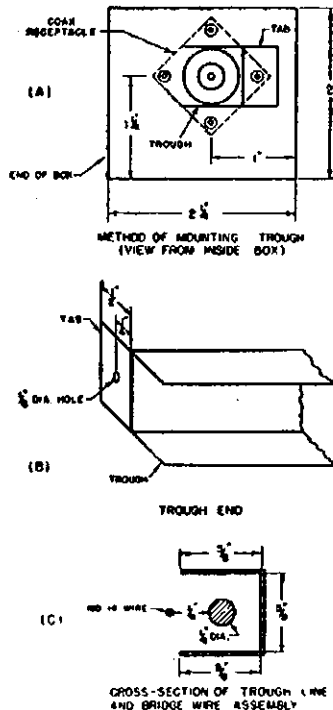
The drawing at A shows the method of mounting the trough to the end of the box. The trough is held in place by one of the screws that fastens the co-ax fitting to the box. Dimensions and constructional details of the trough ends are shown at B. A cross sectional view of the trough, inner conductor, and bridge wire is shown at C.
